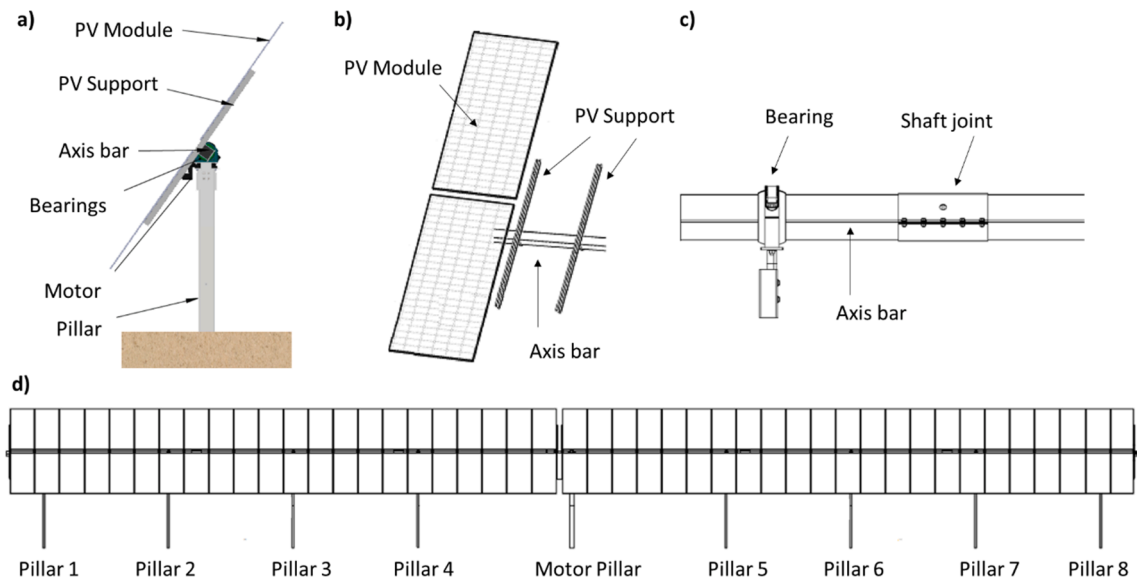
Solar tracker geometry. a) Lateral view. b) Detail of the PV Modules and supports. c) Detail of bearings and shaft joint. d) Front view of the solar tracker.
